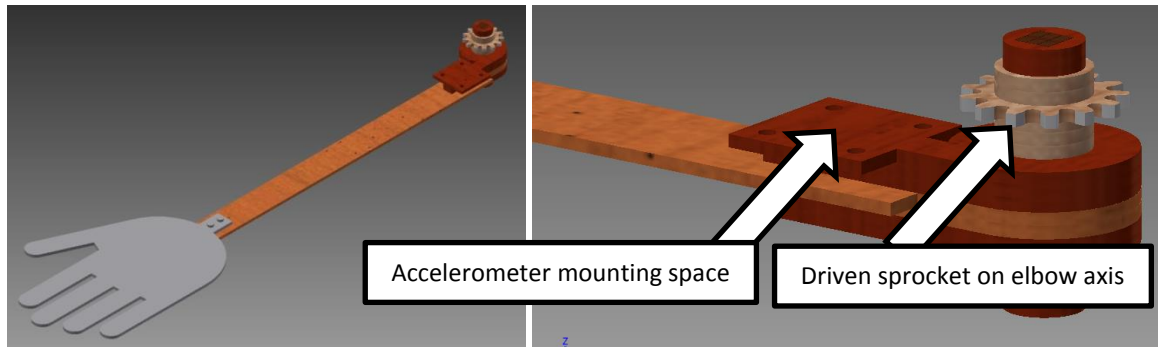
Module H with the elbow axis and accelerometer mounting space
